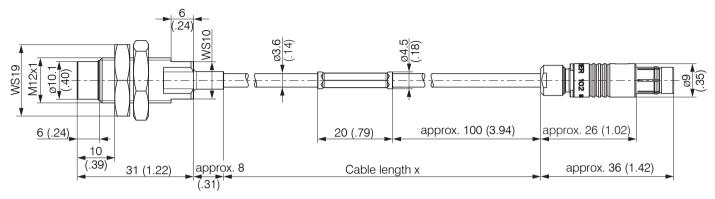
Dimensional drawing sensors ES-U3-C-CAx/mB0, dimensions in mm (inches)
